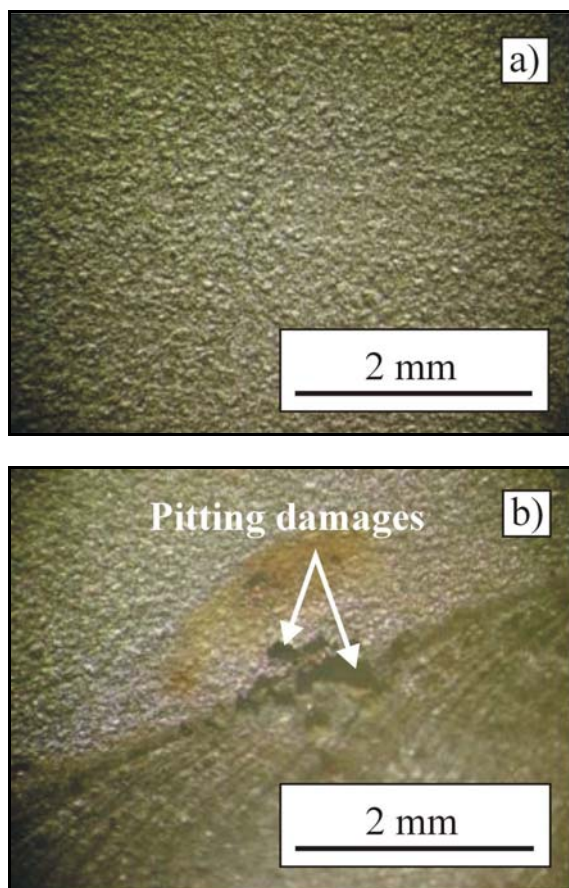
Photographs of AISI 316L stainless steel surface for base metal (a) and at interface of the WM/HAZ (b) after the gravimetric measurements.
